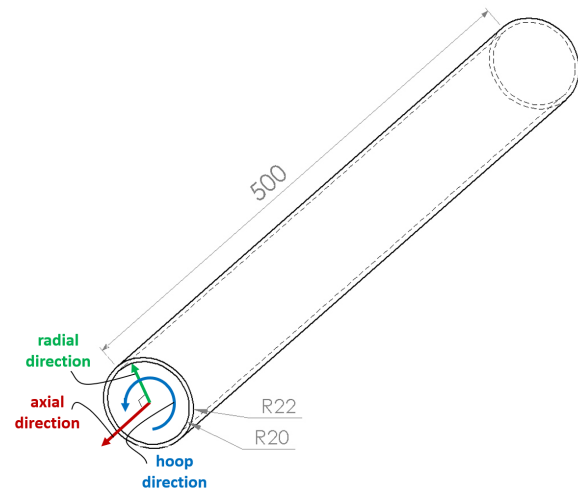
Schematic view of composite driveshaft (Dimensions are in mm)
